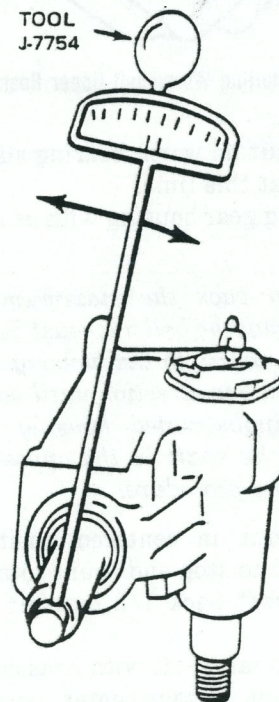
K-17 Adjusting Pitman Shaft Overcenter Drag Torque
